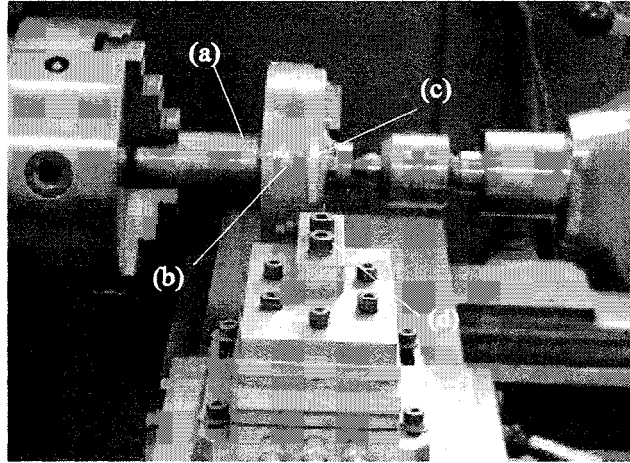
(a) shows the back end of the work-piece holder inserted into the lathe machine (b) work-piece holder (c) work-piece (d) tool holder
